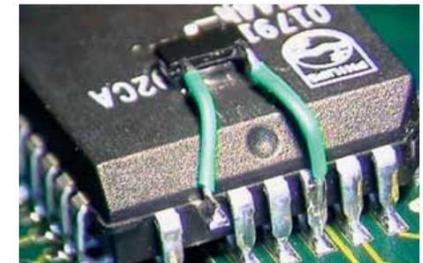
Chip component soldered to surface mount component using jumper wires. Note: One lead of surface mount component is shown lifted.
